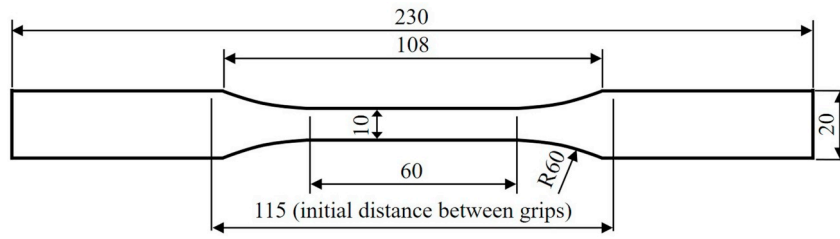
Planar dimensions of the specimens with a thickness of 2 mm used for tensile tests. All dimensions are in millimeters.
